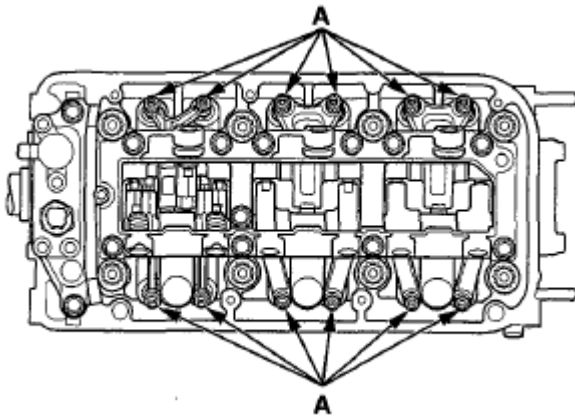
Identifying Front Rocker Arm Locknuts & Adjusting Screws
